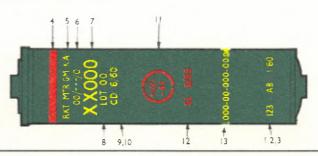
OPERATIONAL (BOOST) ROCKET MOTOR
